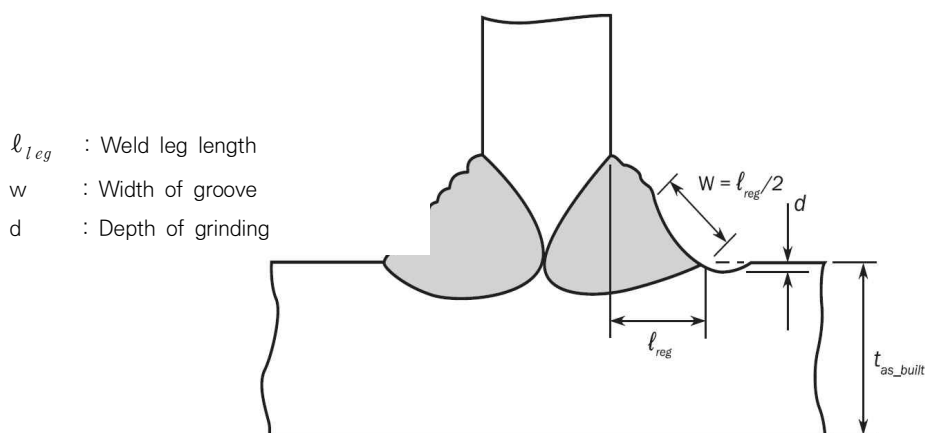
Extent of weld toe burr grinding to remove inter-bead toes on weld surface
